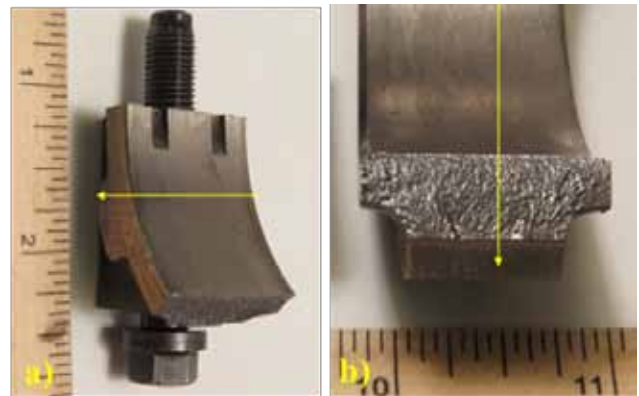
Schematic of sections made at/near the fracture surface(s): a) transverse section of the top fracture surface; b) axial section of the bottom fracture surface
